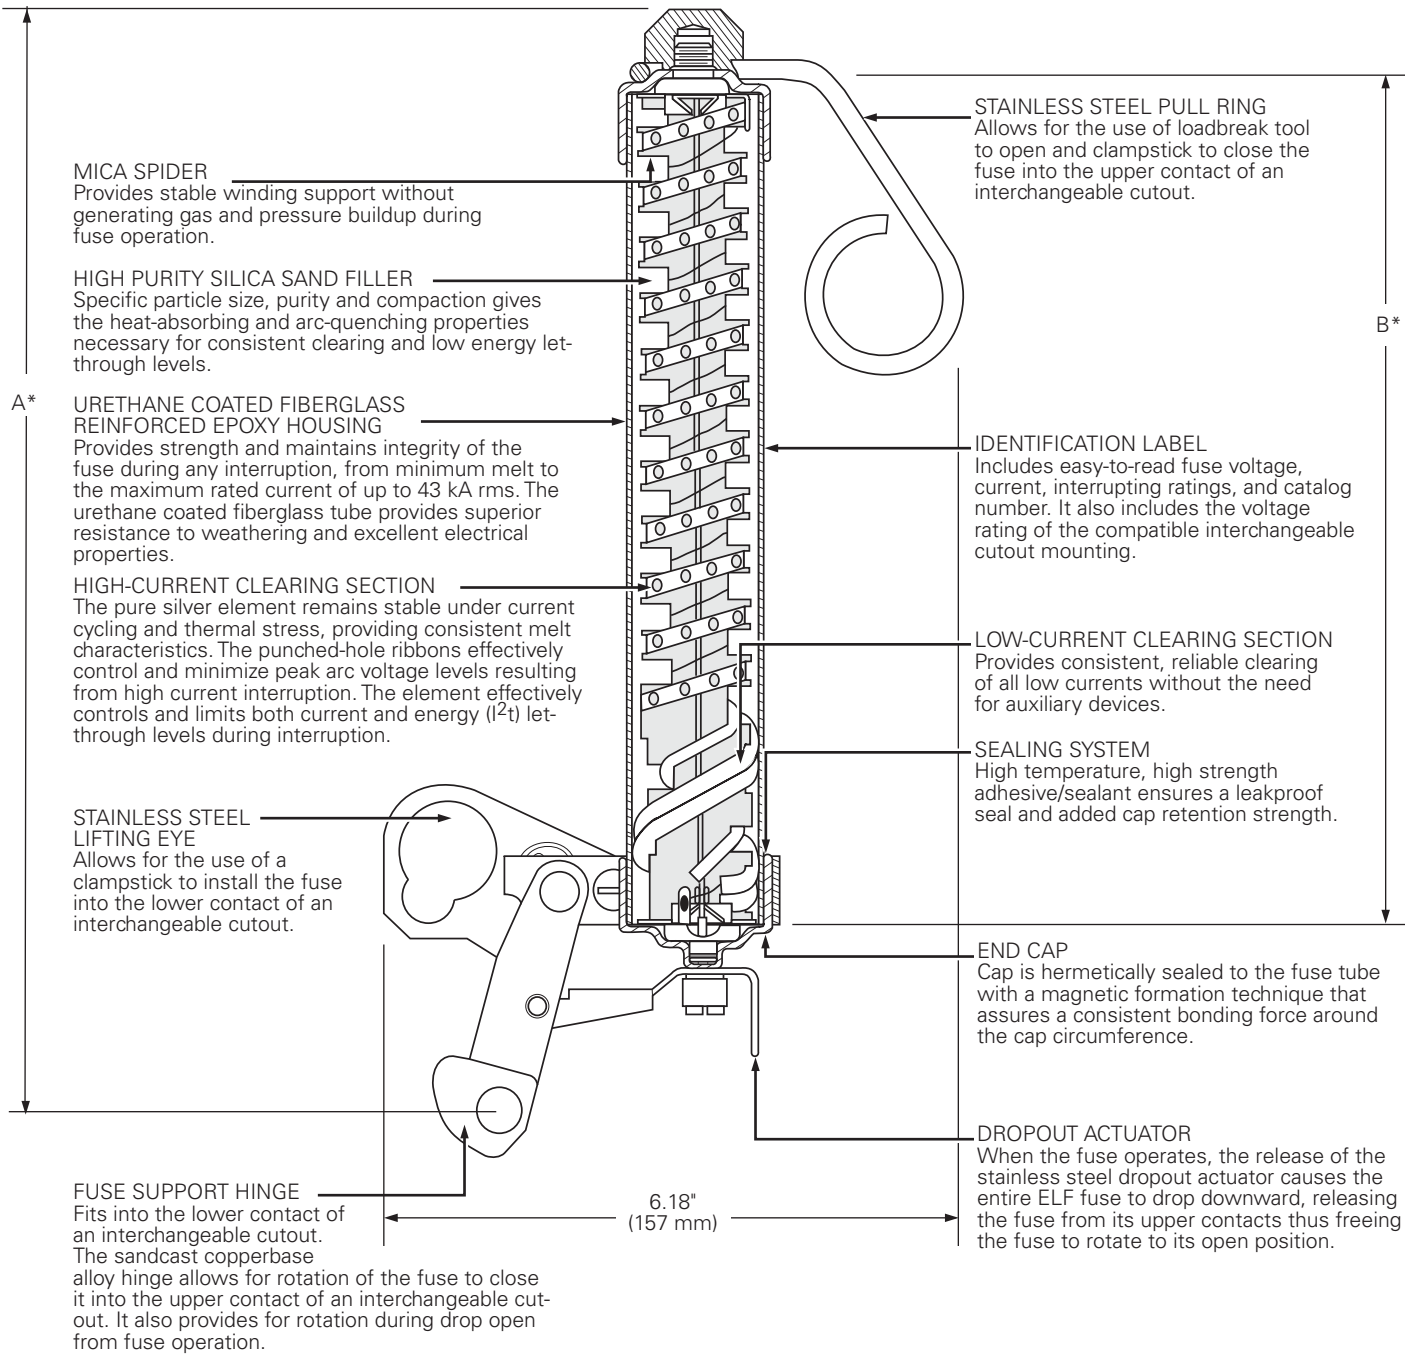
Line illustration of single-barrel ELF fuse cutaway with dimensions.
